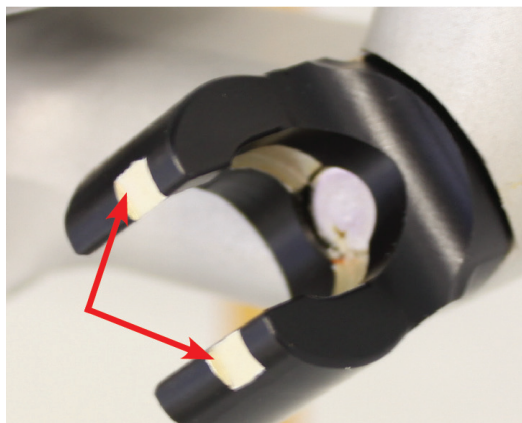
Lower Bearing Retainer with indication groove (see red arrows) on the front of the retainer
